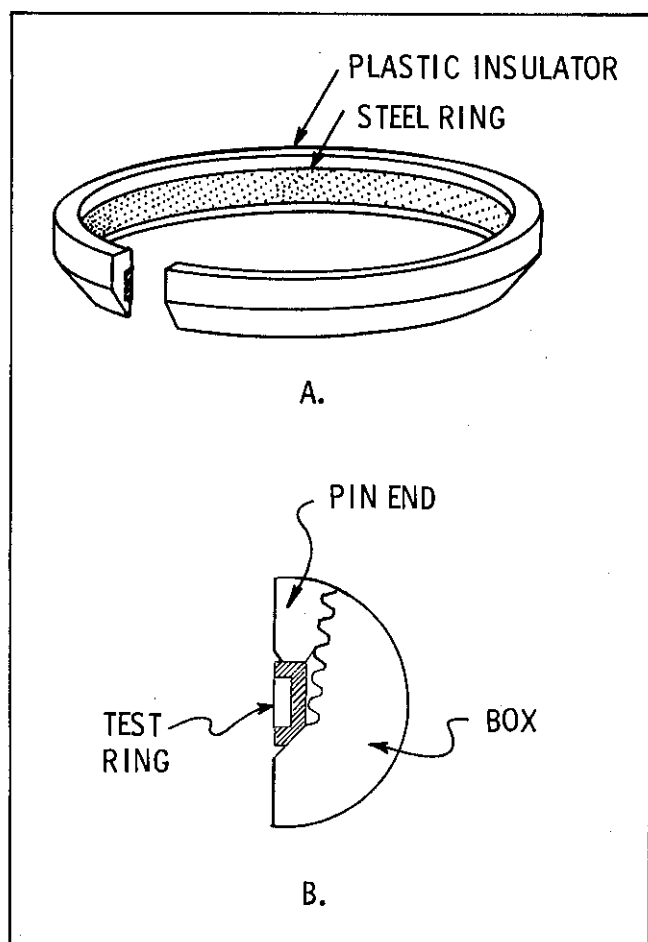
Drill string corrosion test ring. A. Plastic-mounted ring. B. Ring positioned in tool joint recess.
